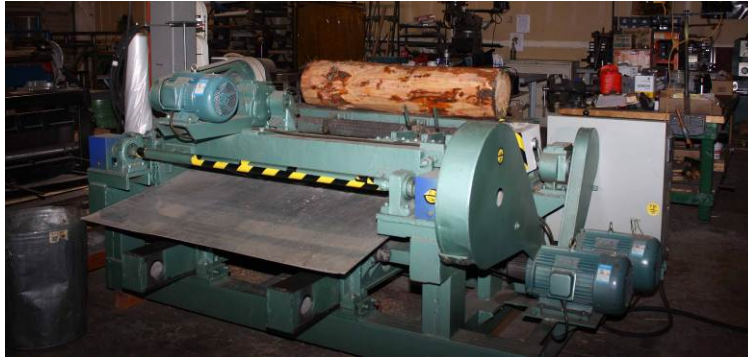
Short block centerless veneer lathe manufactured by FeiXian Ruihao Machinery.
